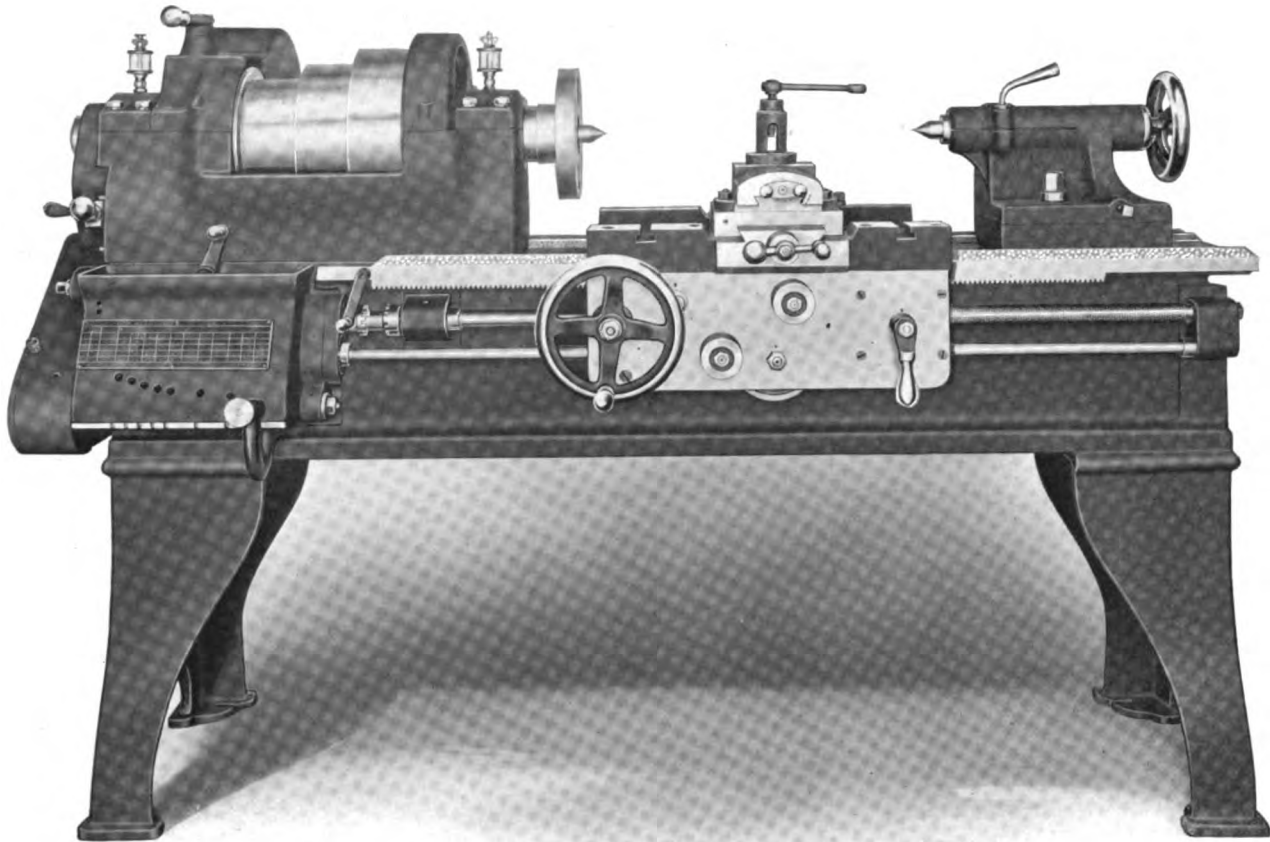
Flather 16-Inch Swing, Belt Driven, Double Back Geared Lathe
